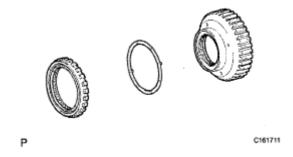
Identifying No. 1 Planetary Carrier Thrust Washer And 1-Way Clutch Inner Race
